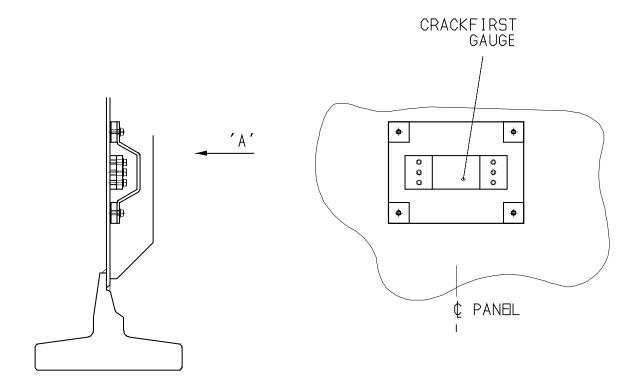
Scrap View in Circle C on Inside Face of Panel
